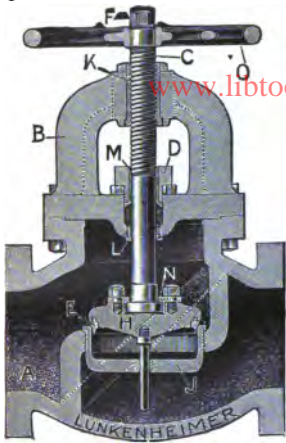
Sectional View of Extra Heavy Pattern Globe Valve.
